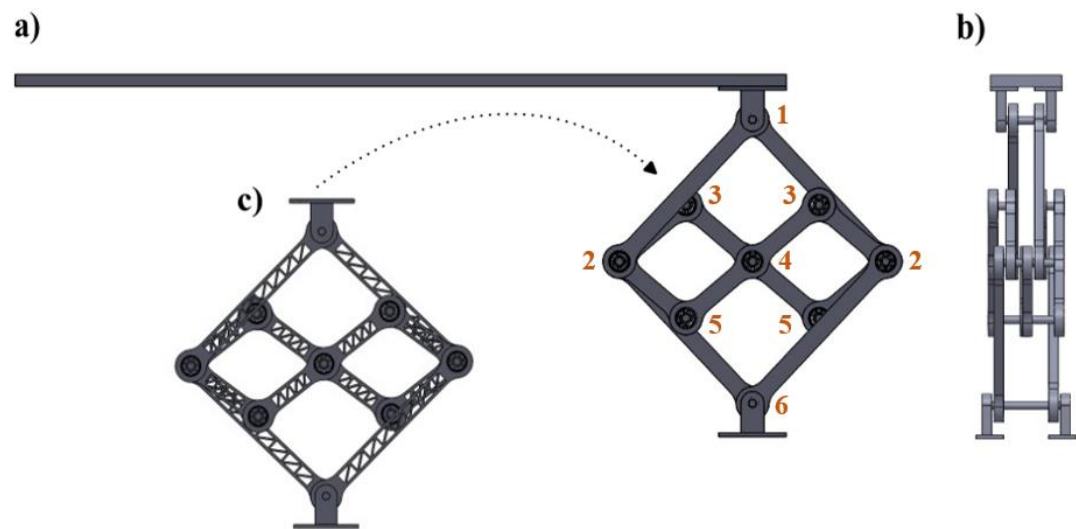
a) A front view CAD assembly model of the compound IA affixed to a cantilever beam. b) A side view CAD assembly model of the compound IA. c) A front view CAD assembly model of the compound truss IA.
